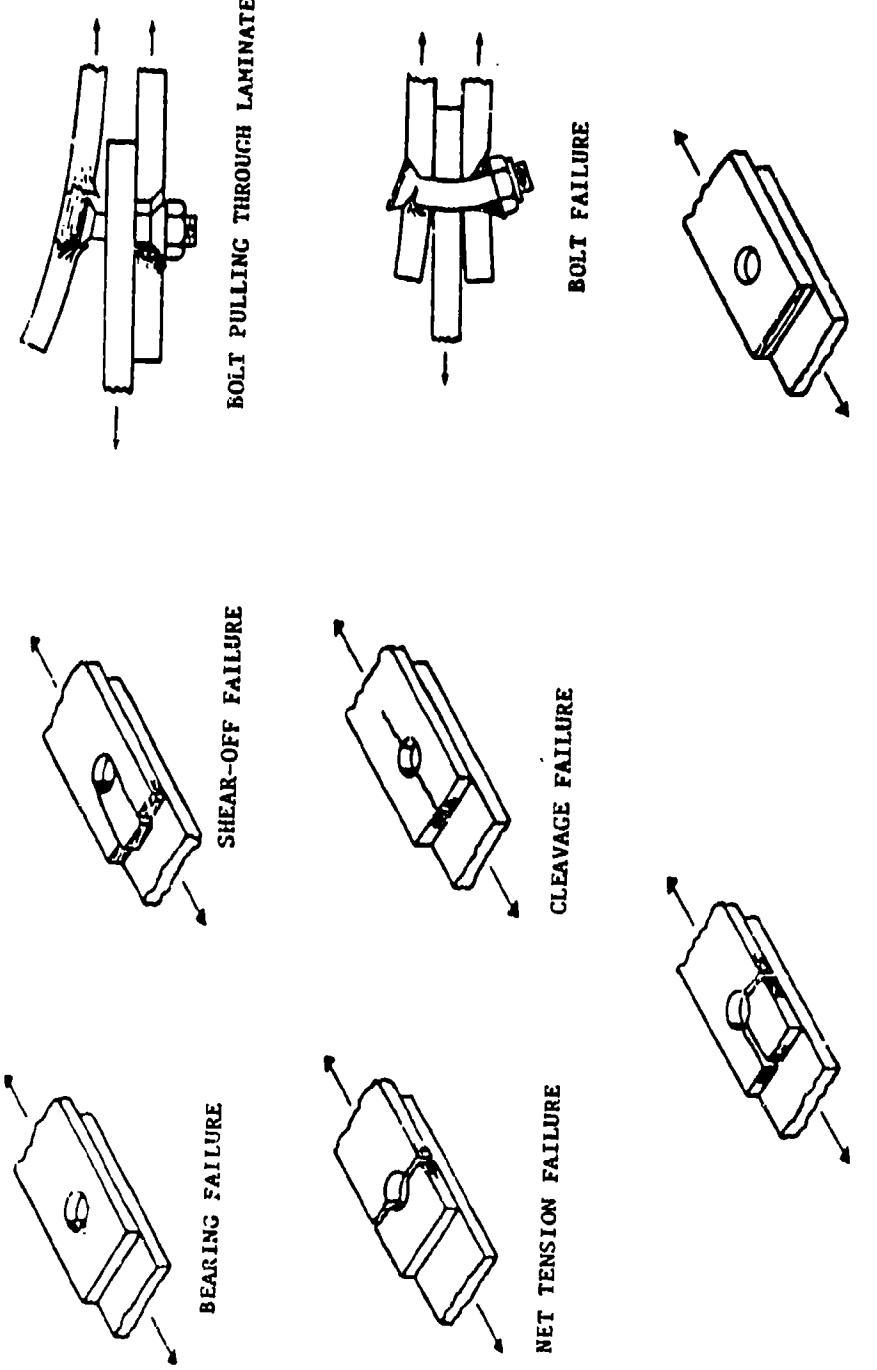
Basic Failure Modes in Bolted Laminates and Fastener-Related Failures.
